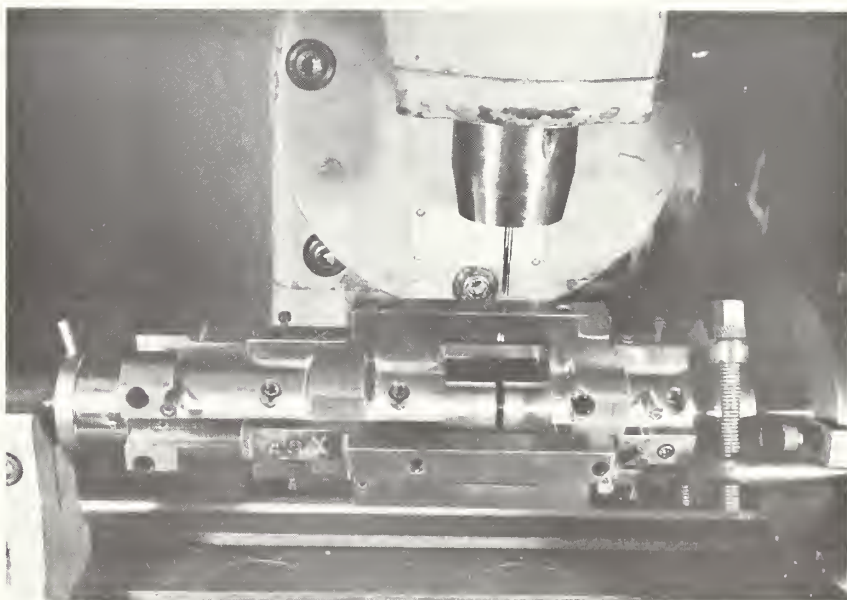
The machining set-up for machining the neck in the specimen. The specimen is held in the machining jig with the latter mounted between centers. Three of the ribs connecting the two halves of the jig can be seen. The milling head is centered over the neck which has just been machined.
